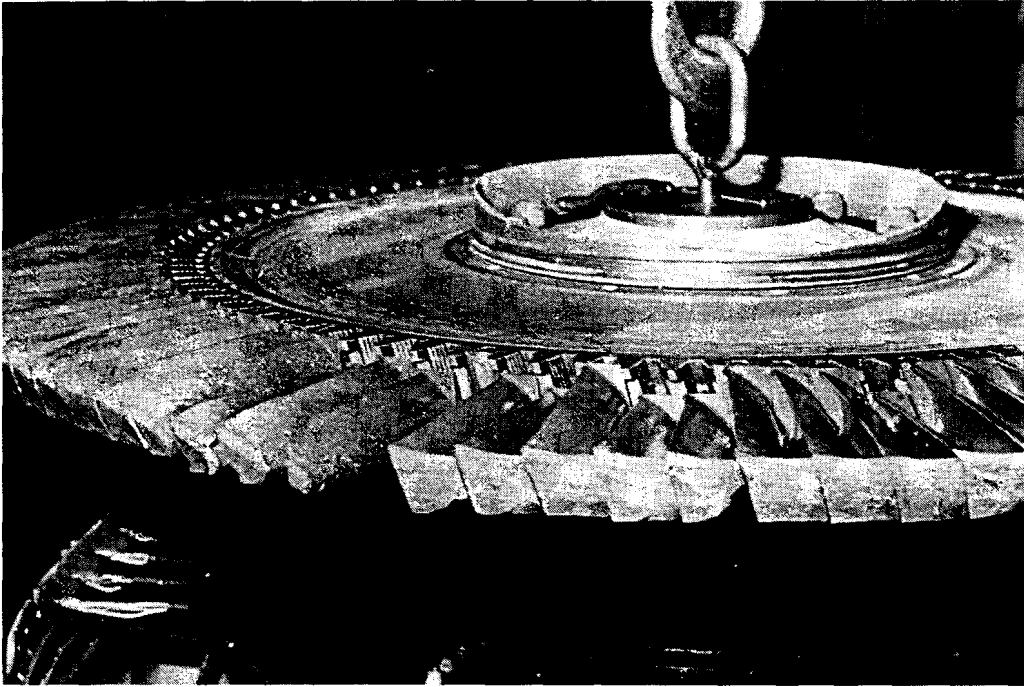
DAMAGED HP NOZZLE GUIDE VANES
